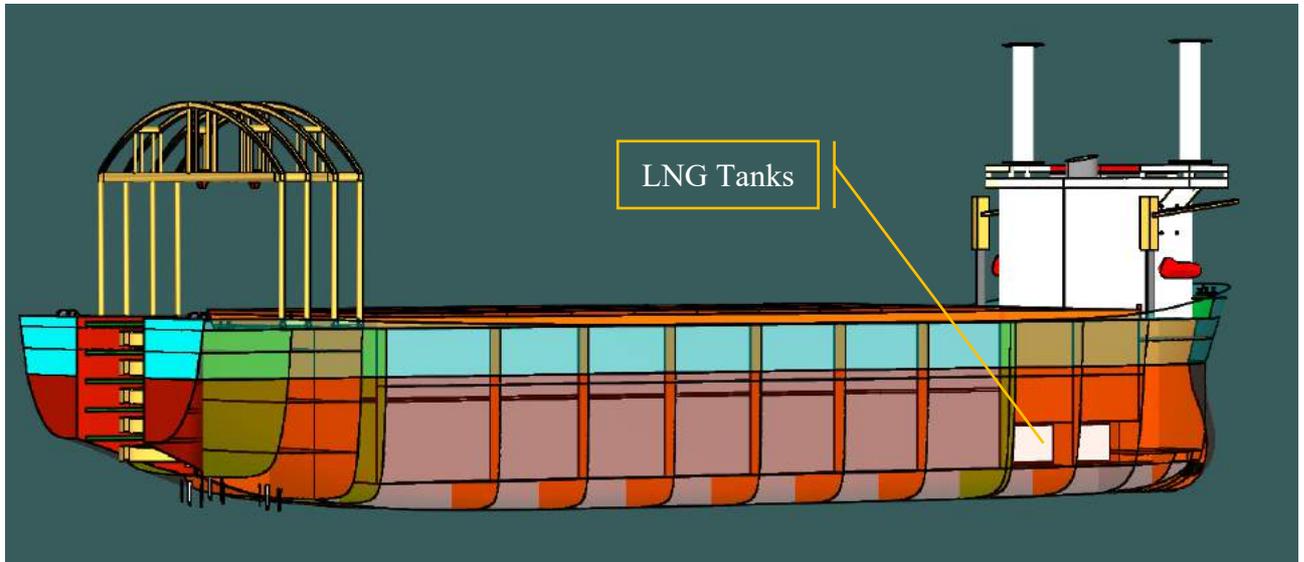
LNG tanks of Decom Tools Vessel (Perspective View)
